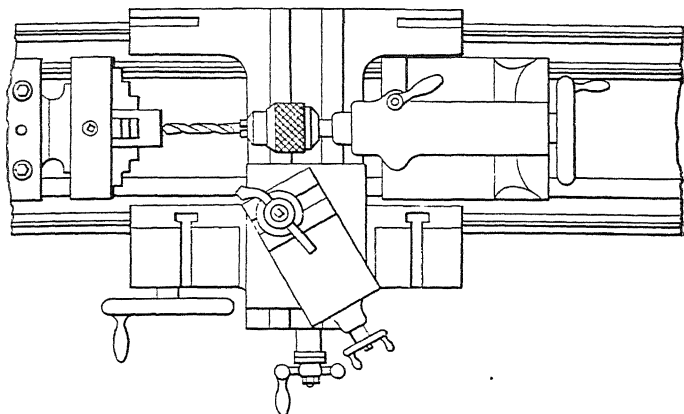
For holes under  $\frac{1}{2}$  in. use the drill chuck with a shank that fits the taper hole in the tailstock spindle.
